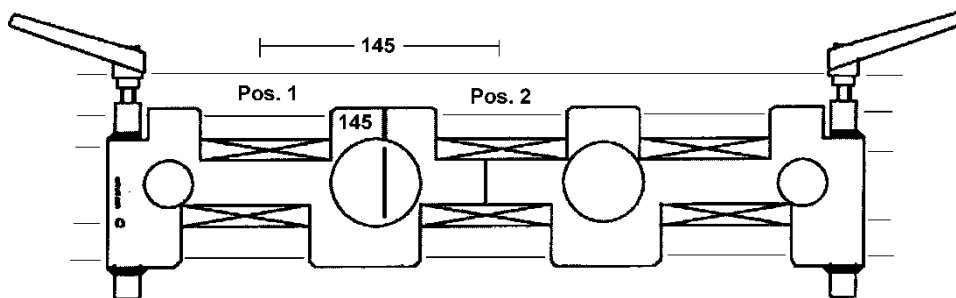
Distance gauge MRF SR-SFA for drilling jig LD-1P
